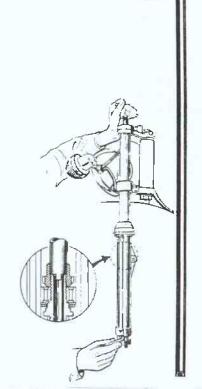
A-A special tool is helpful for holding the damper tube while removing screw.
